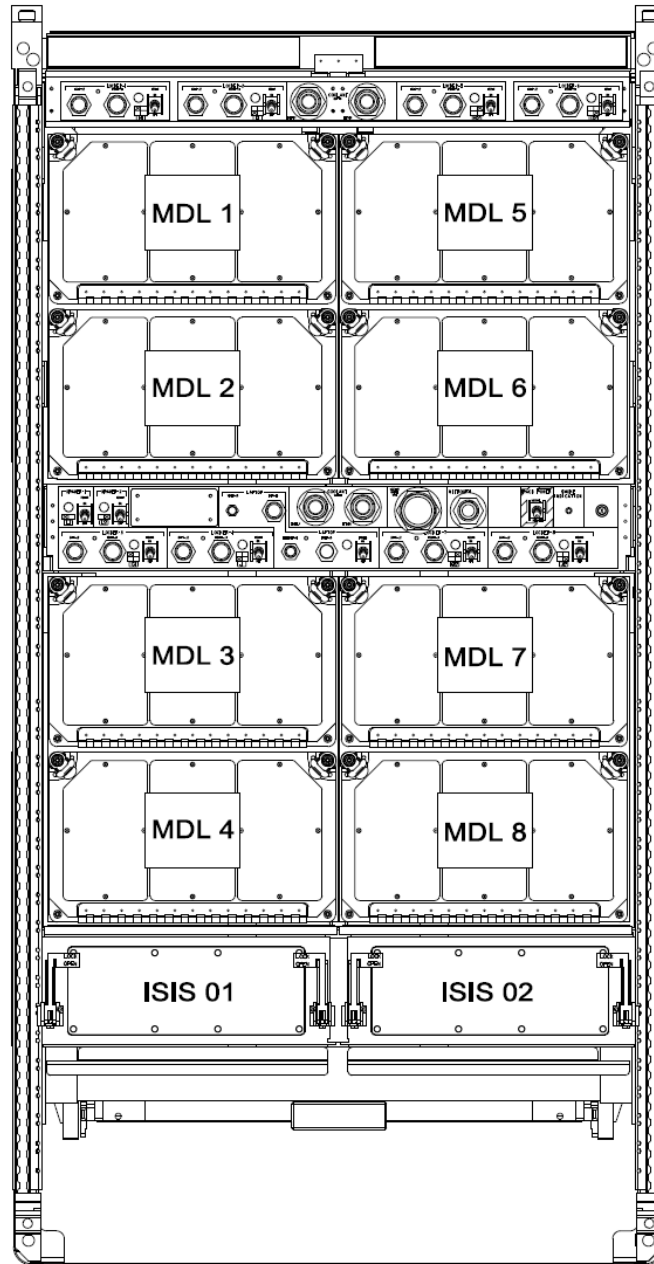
SUBRACK LOCATIONS
